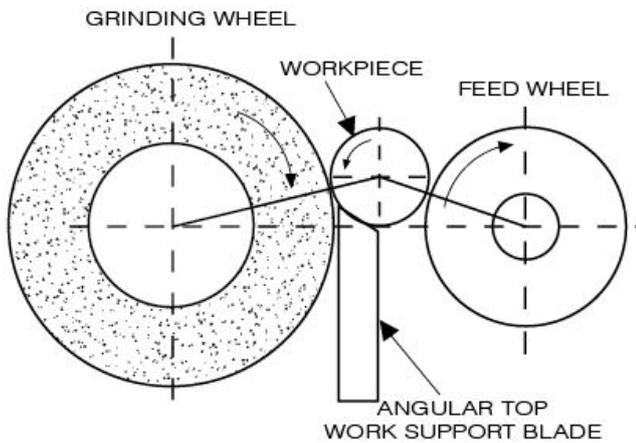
Structure of the Centerless Outside Diameter Grinding machine
